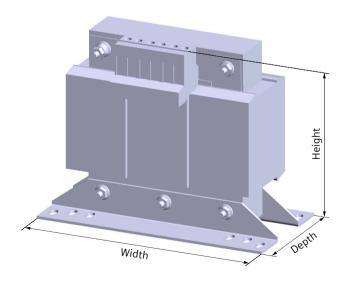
Dimension drawing of line reactors for Smart Line Module 16 kW ... 55 kW
